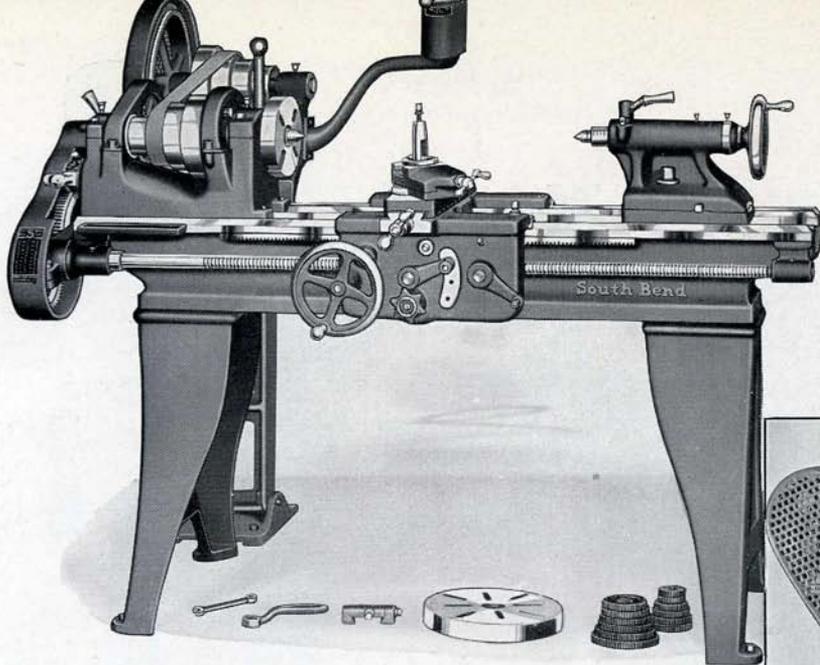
Cat. No. 912-B, 13"x5' Standard Change Gear Pedestal Adjustable Motor Drive Lathe, complete as shown.....\$515.00
